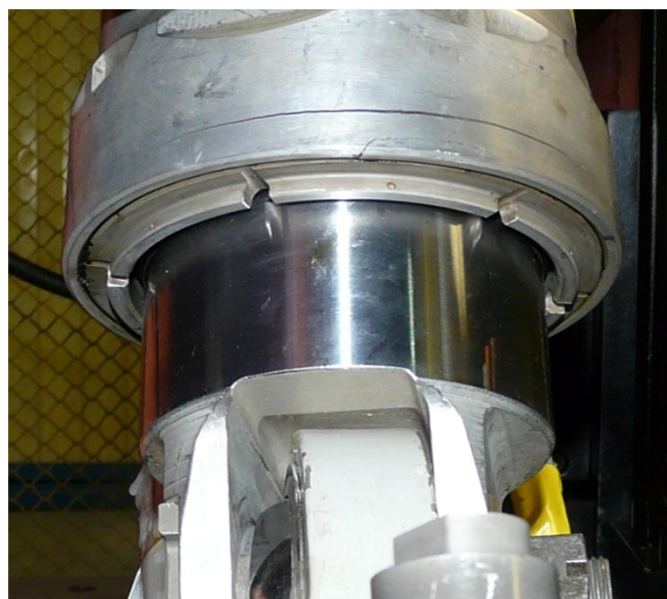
The new landing gear shock absorber with a visible crack at the bottom end of the cylinder
